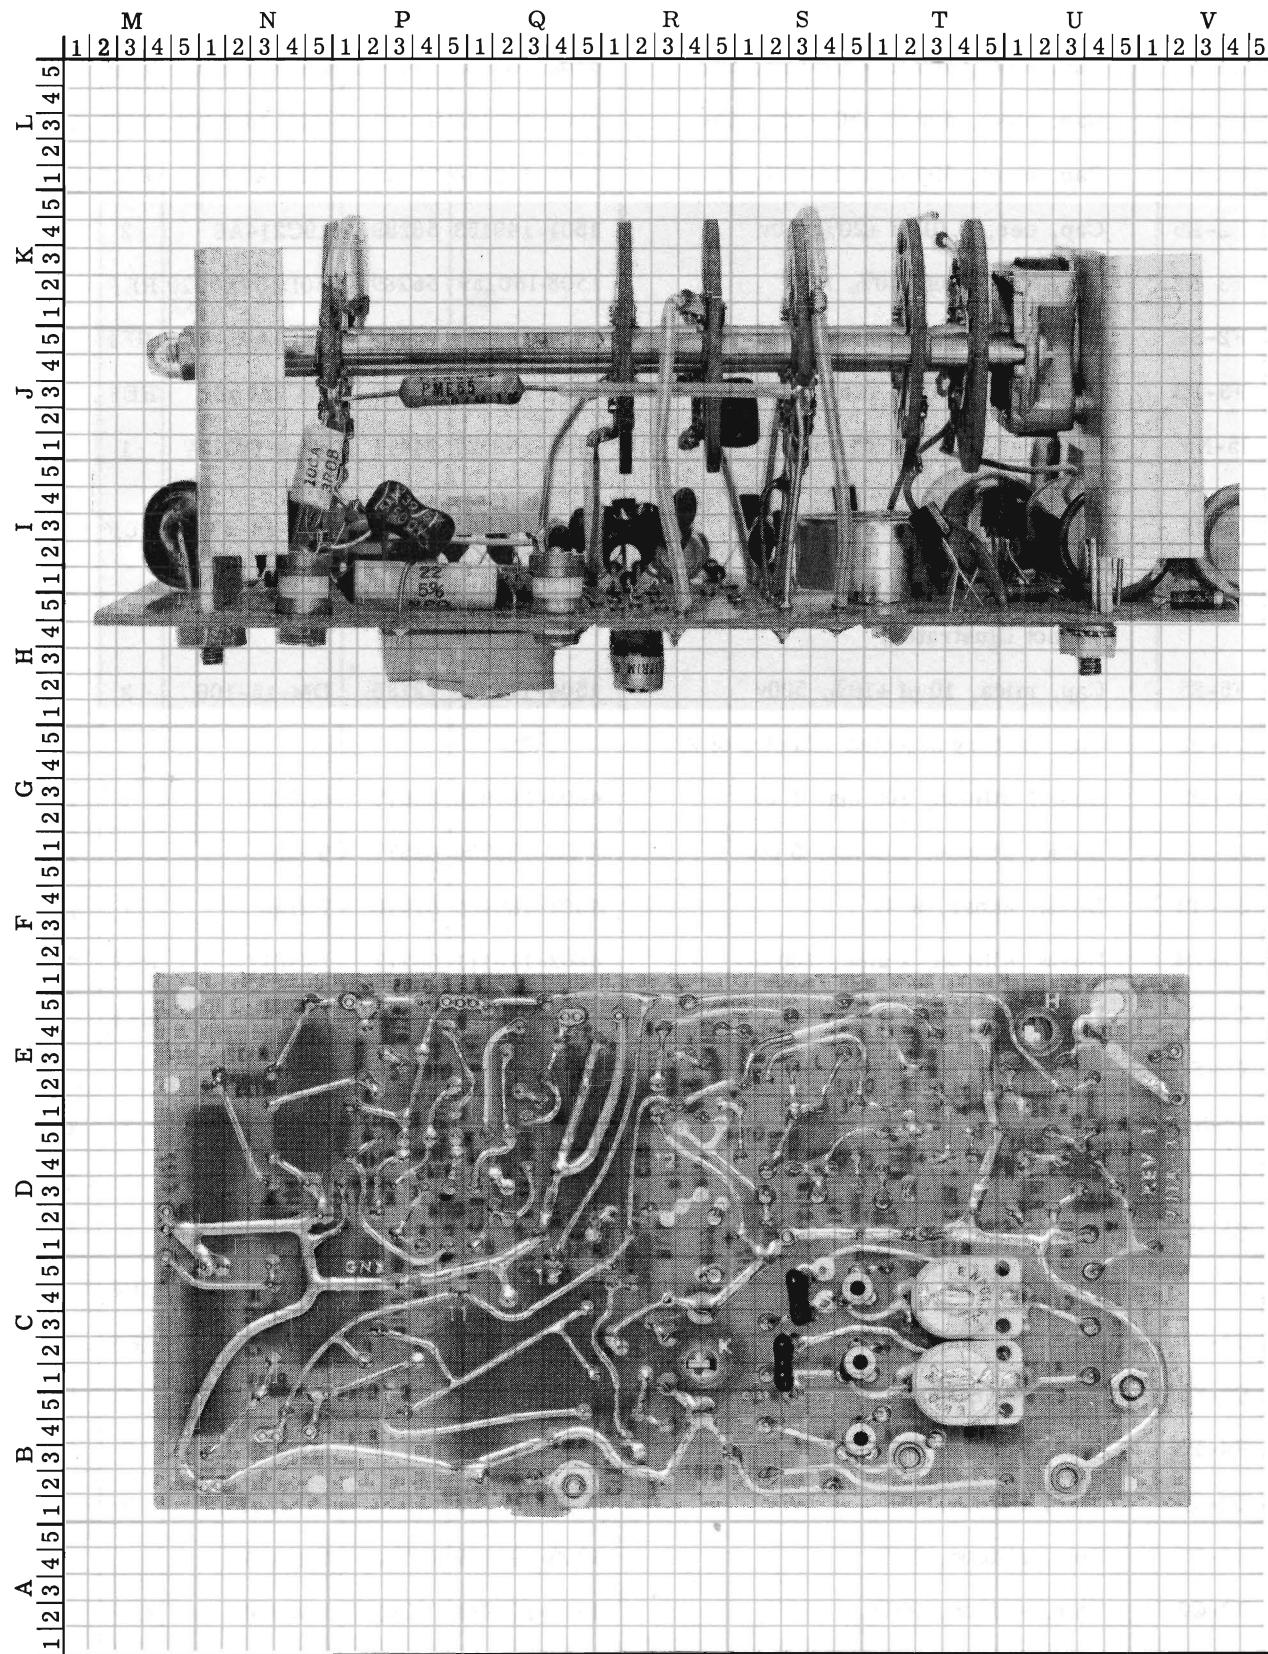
INPUT AMPLIFIER AND POWER SUPPLY ASSEMBLY (Sheet 2 of 2)
